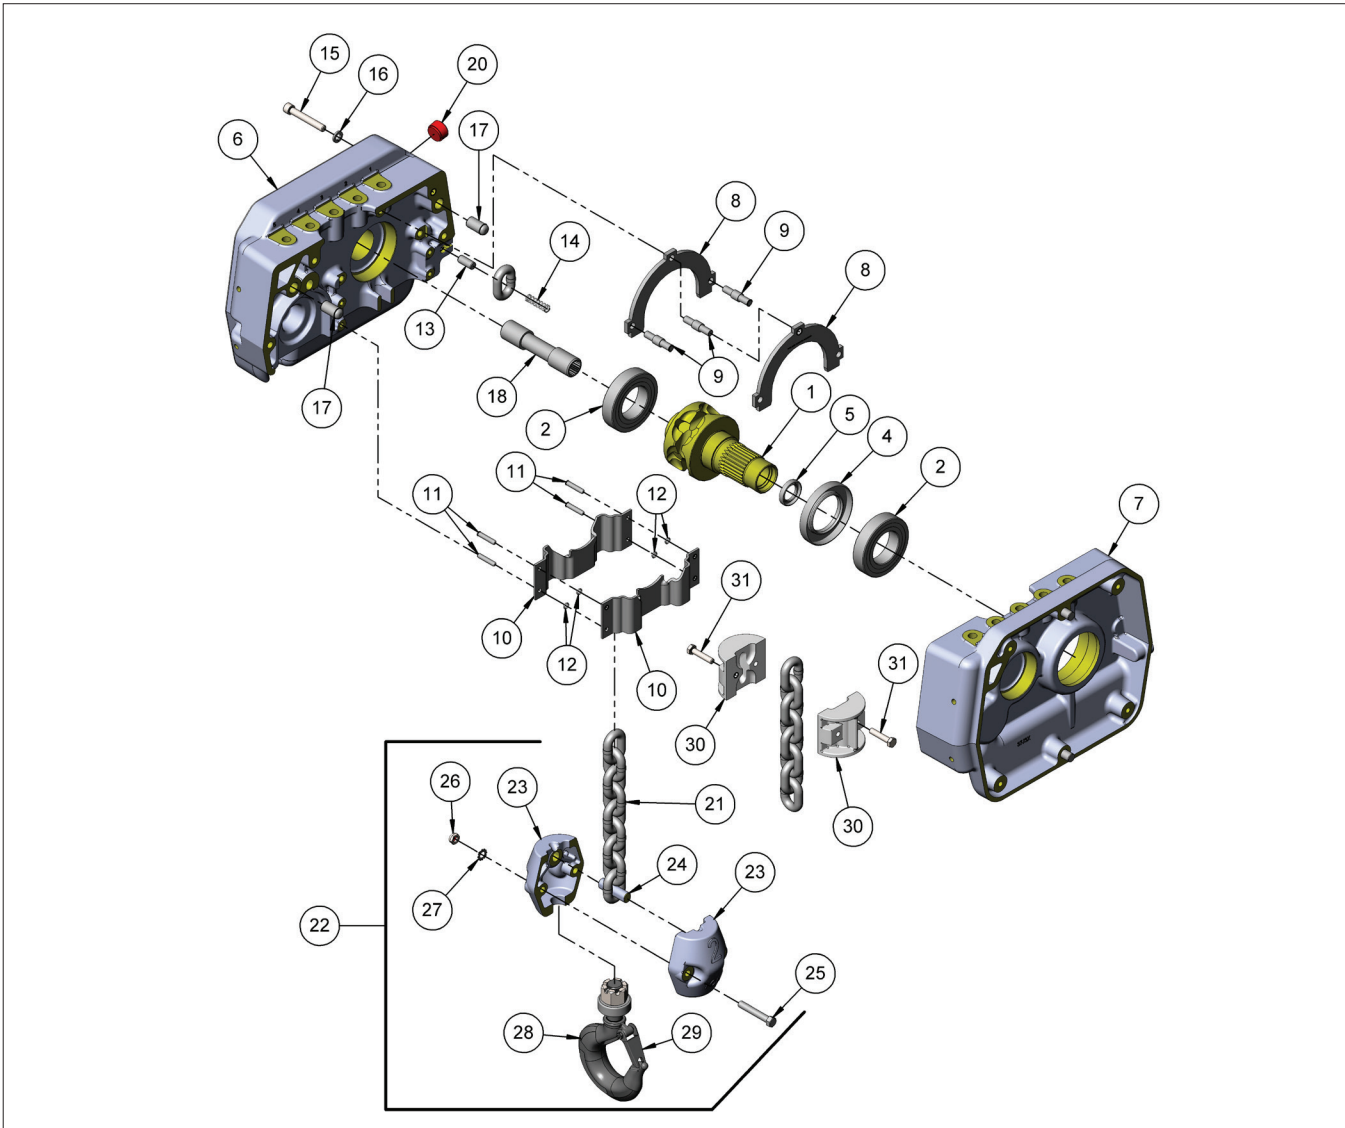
A. CHAINING PARTS (SINGLE CHAIN)
